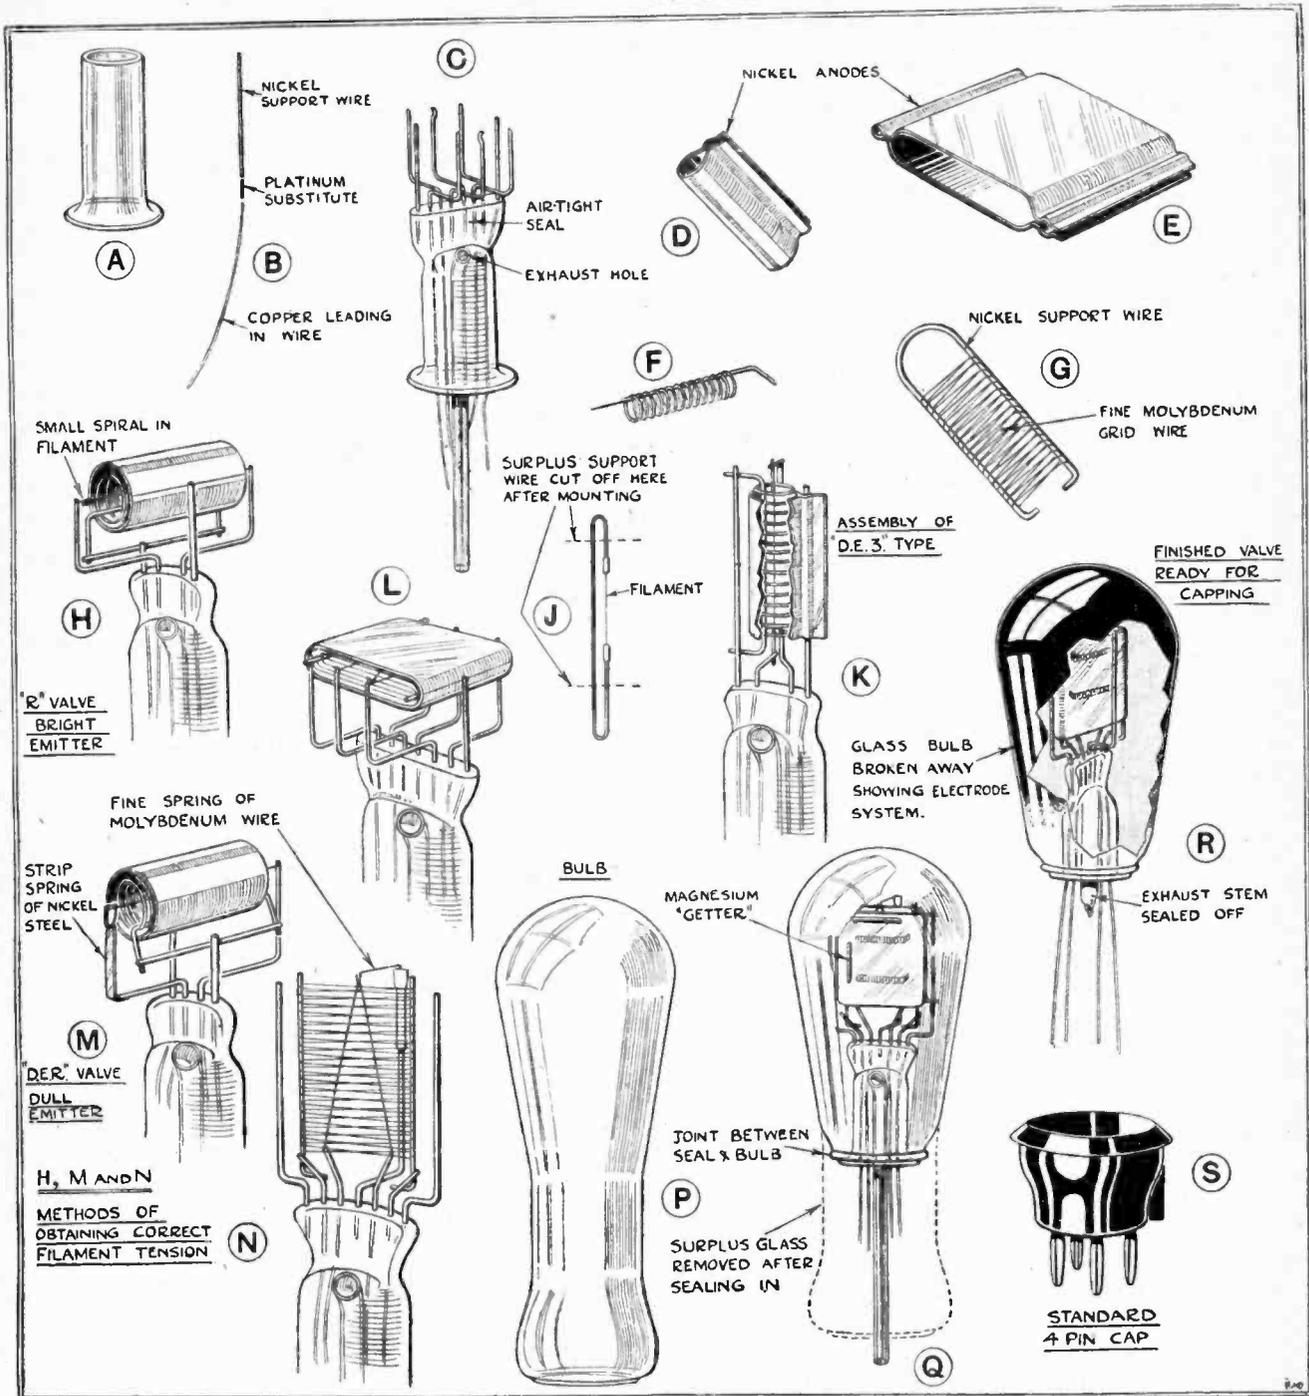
Types of receiving valves and processes in their construction. (A) glass flange; (B) construction of leading-in wires; (C) complete assembly of foot with wires fused into "pinch" and exhaust stem attached; (D) cylindrical anode; (E) "flat" or oblate anode; (F) cylindrical grid with single support wire; (G) "flat" grid with "hairpin" support; (H) electrode assembly in bright emitter valve, showing spring tension on filament; (J) .06 filament and support prior to assembly; (K) electrode assembly of .06 valve; (L) low temperature filament supported without spring tension; (M) method of springing straight horizontal filament; (N) springing of inverted V filament; (P) original shape of bulb; (Q) valve ready for exhausting; (R) "gettered" valve ready for cementing to standard 4-pin cap (S).
